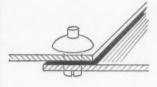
Inserted in hole, Southco Rivets are quickly set by driving pin with hammer. No special tools are required. Bucking is not necessary.
